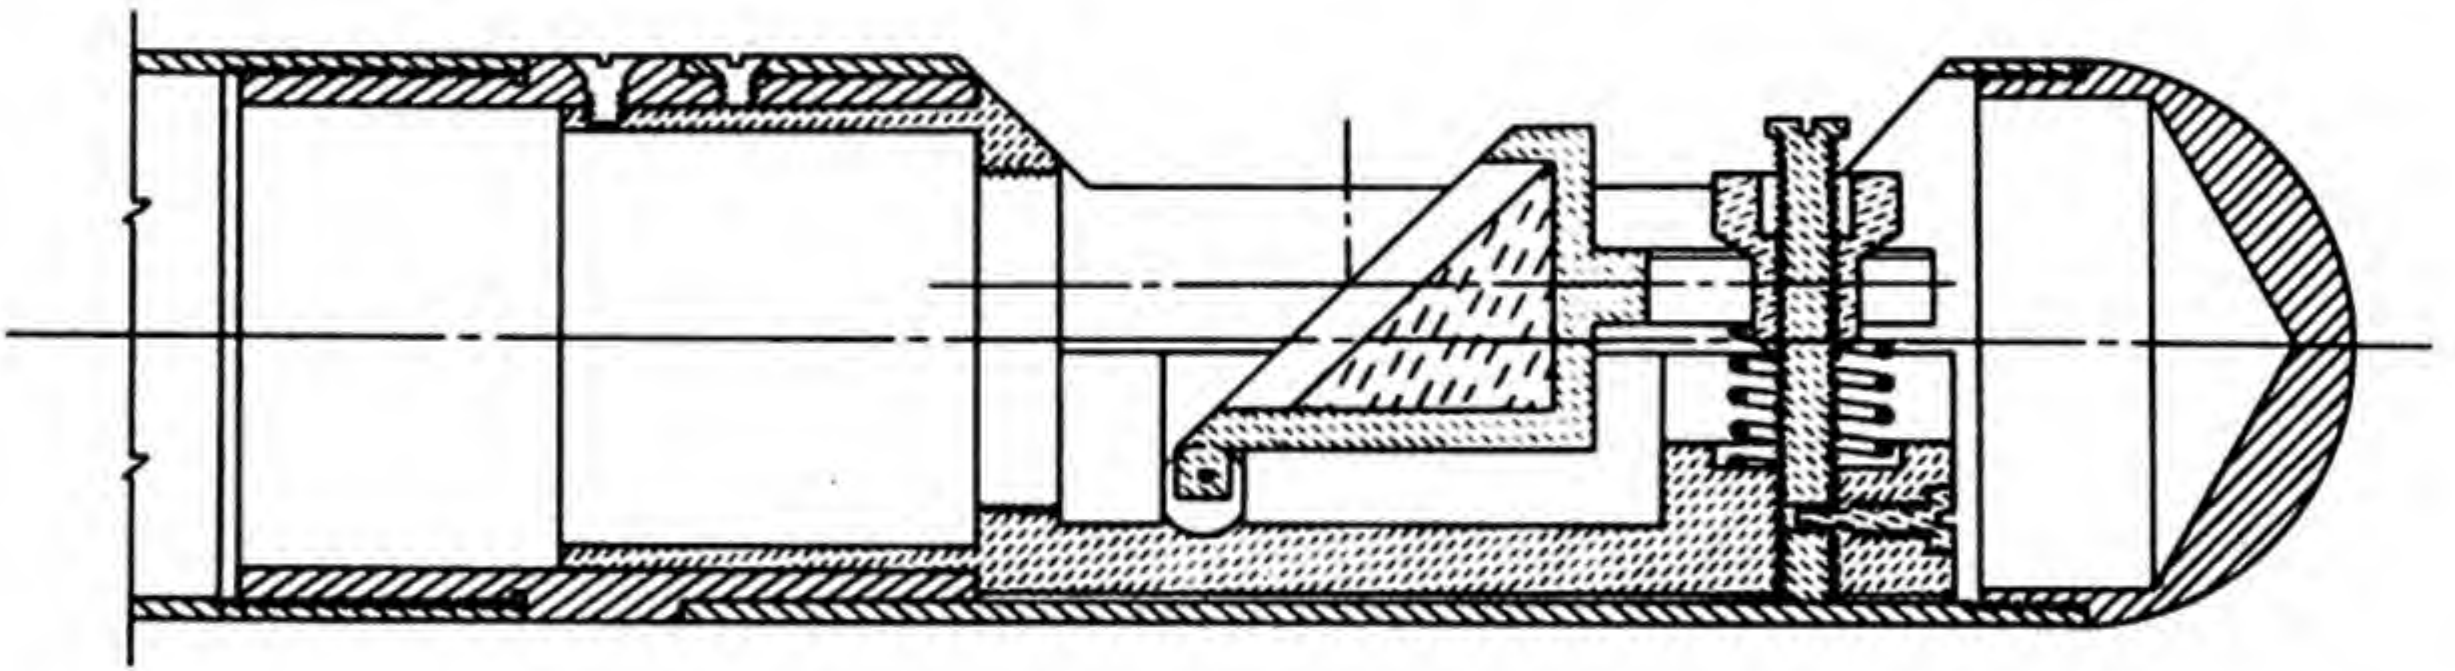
Type D-B periscope head showing the adjustable mirror mount and threaded mount for the plastic objective-lens assembly.
